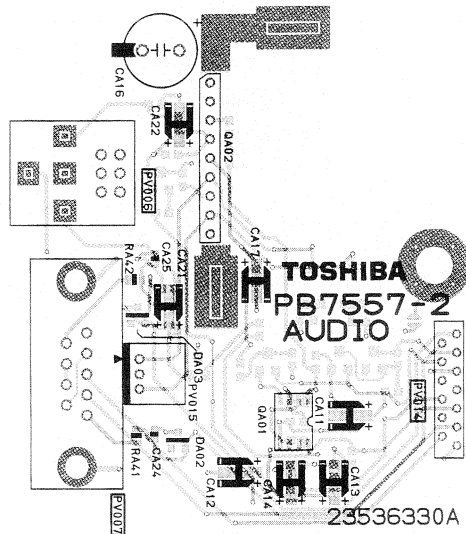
U0032 Audio PC Board (Top Side)
